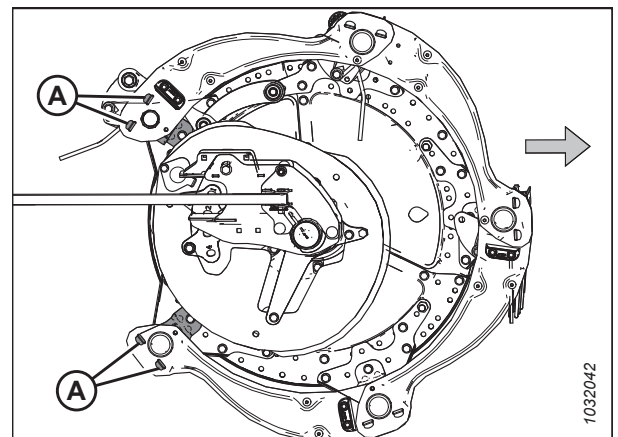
Reel Endshield Removed – Outboard Cam End
